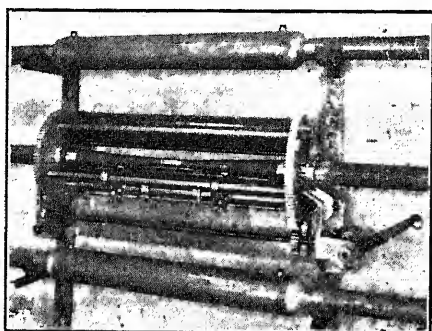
MACHINE READY TO WRAP PAPER INSULATION IN STEPS
